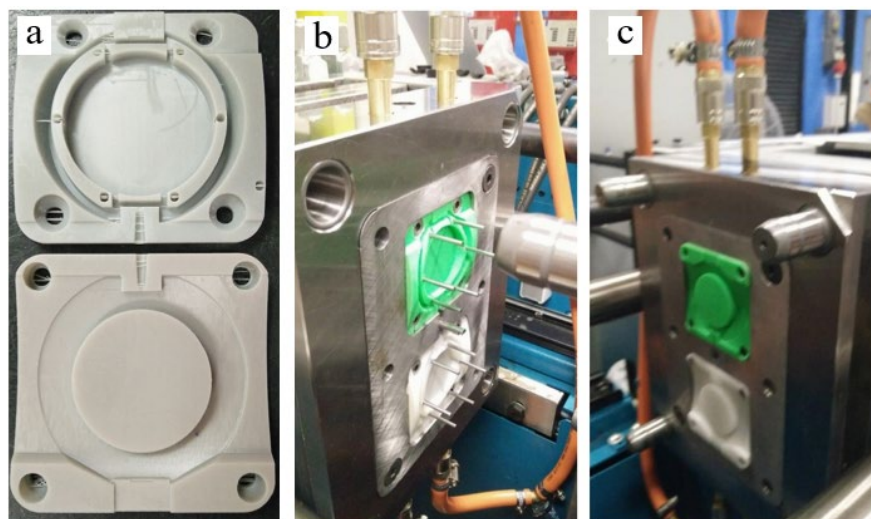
SLA 3D mold inserts manufactured using Viper Si2 (a), ejection side (b) and injection side (c) of the 2-cavity mold with two different FFF mold inserts 3D printed using UP Plus 2.
